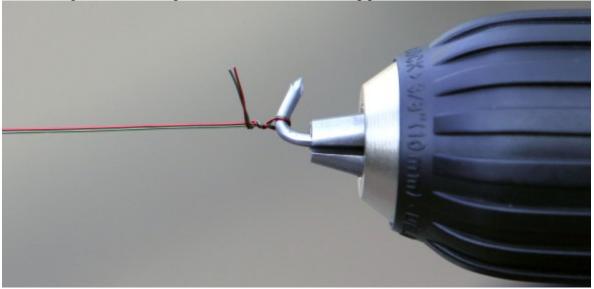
Bent nail in a Drill Chuck with two wires to be twisted
